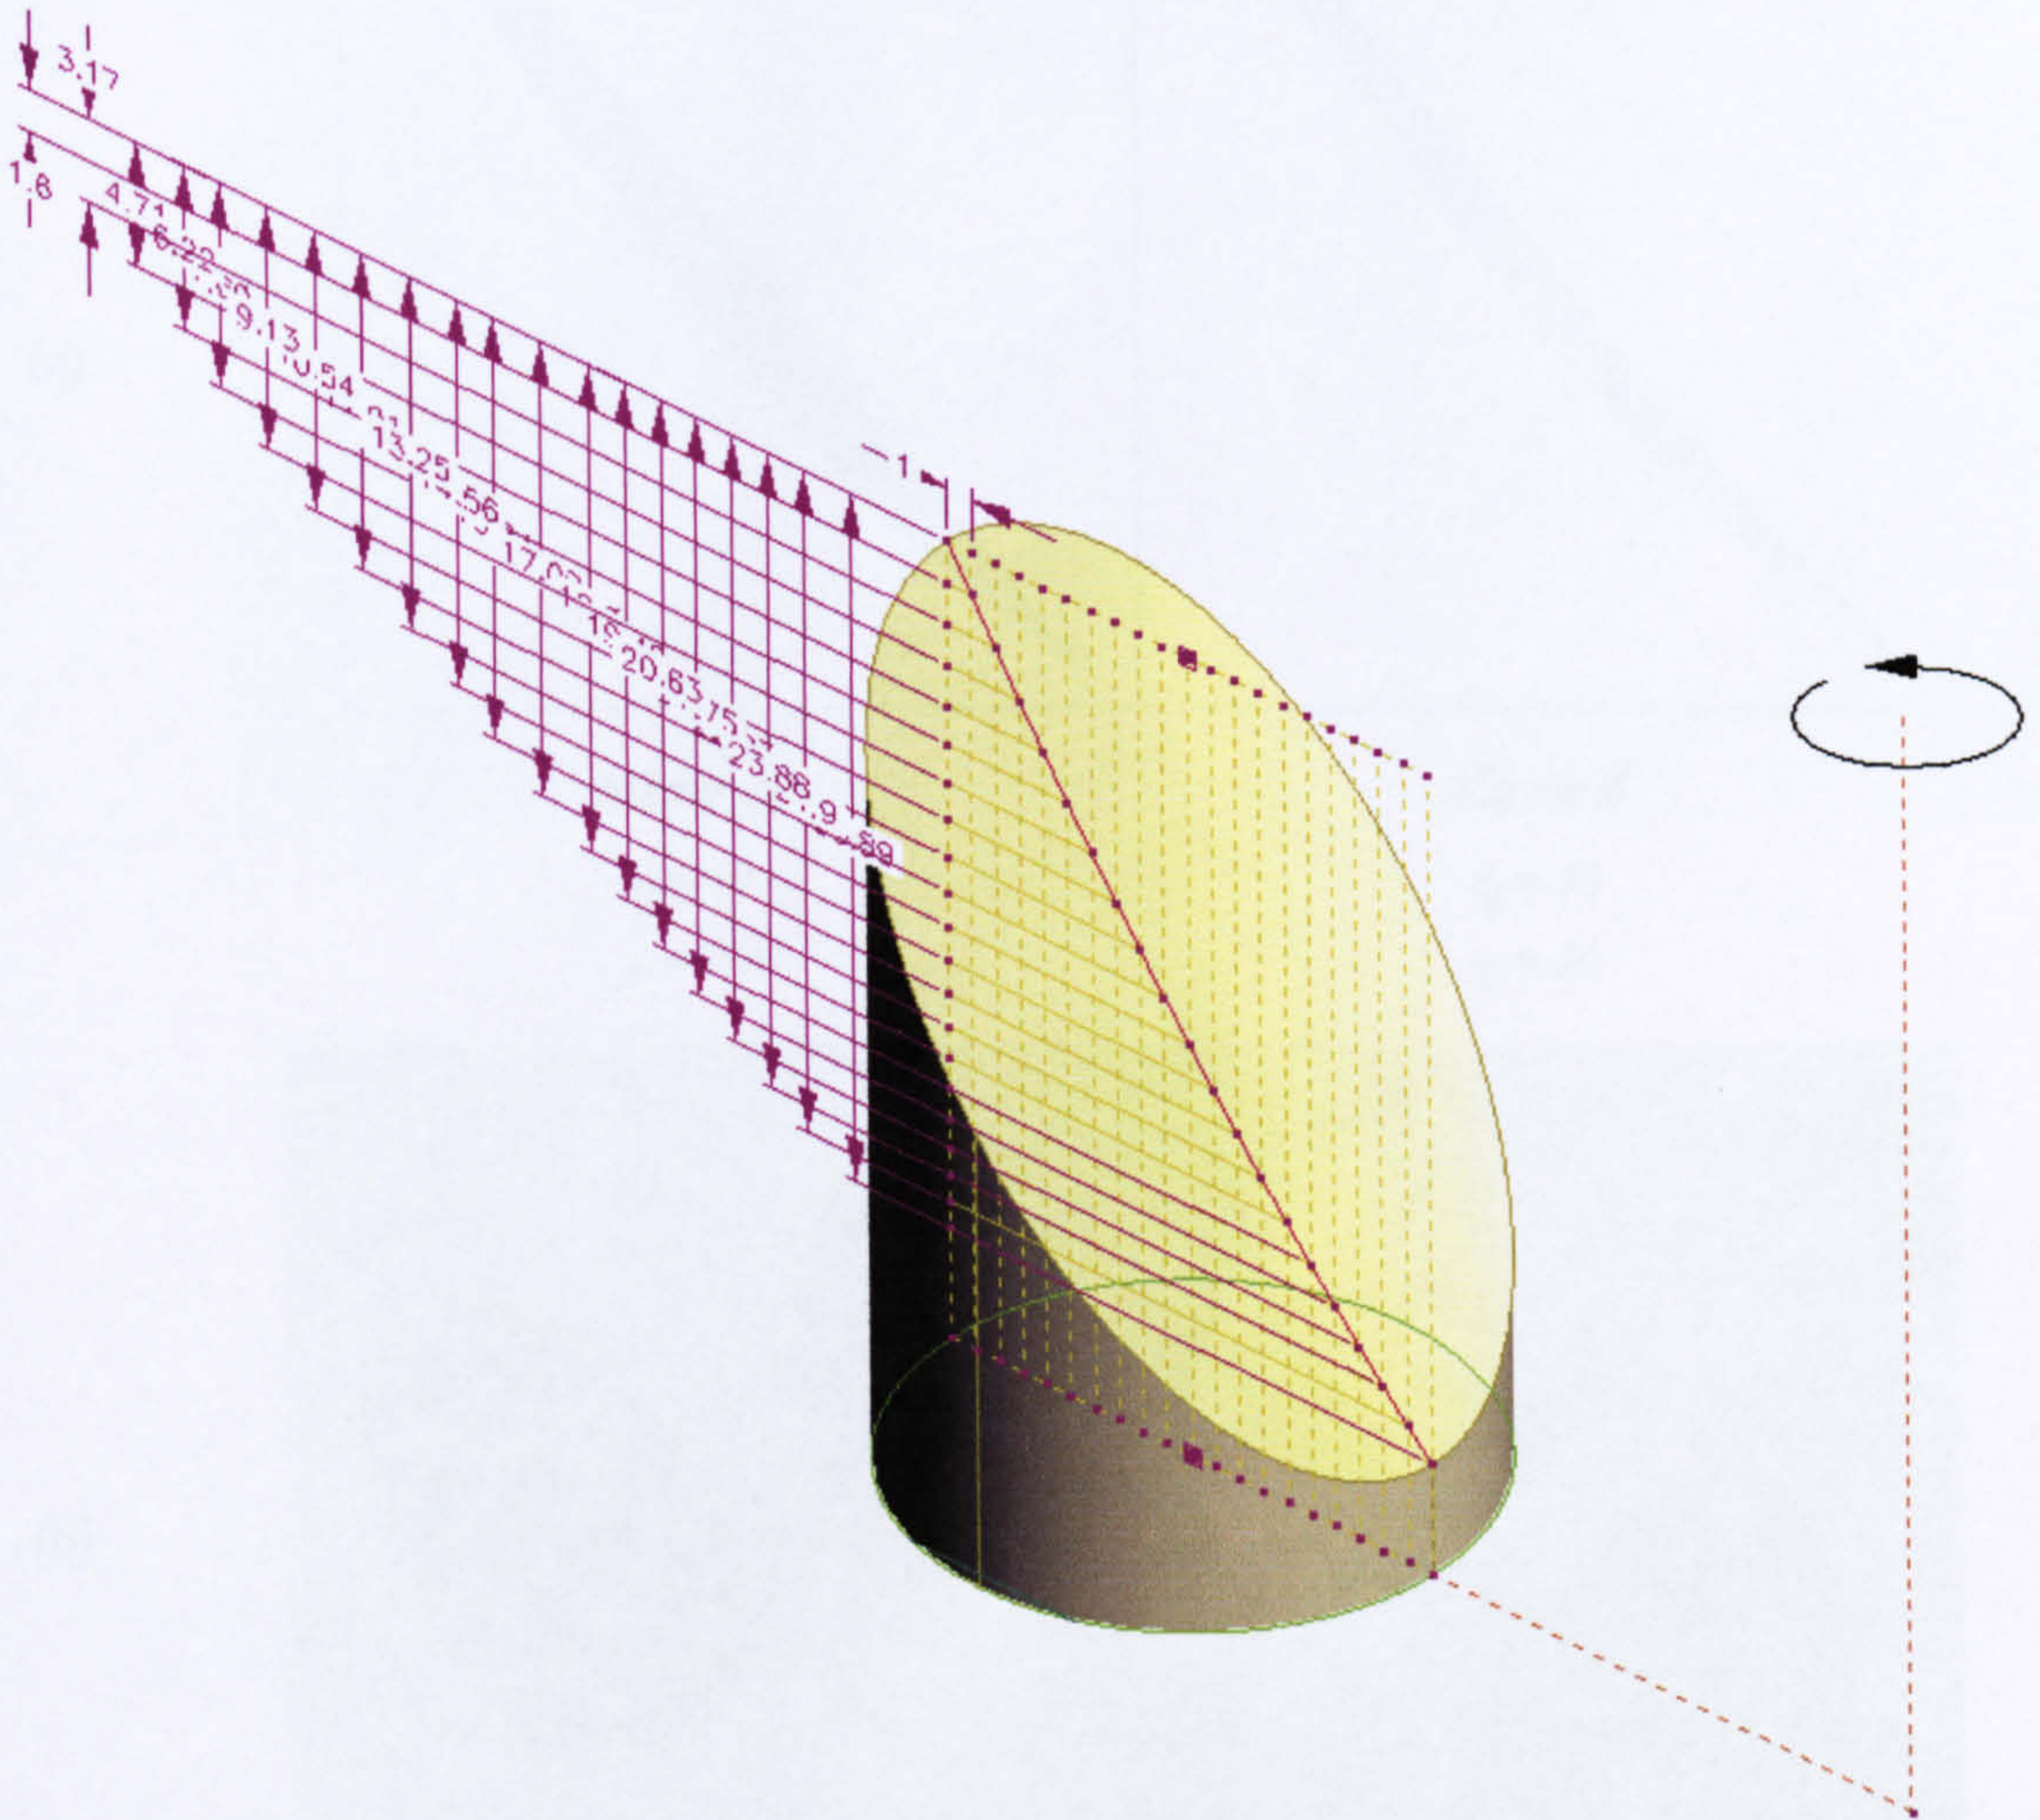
CAD model with dimension and construction lines of a fully focused parabolic mirror for manufacturing on the MSL machine
